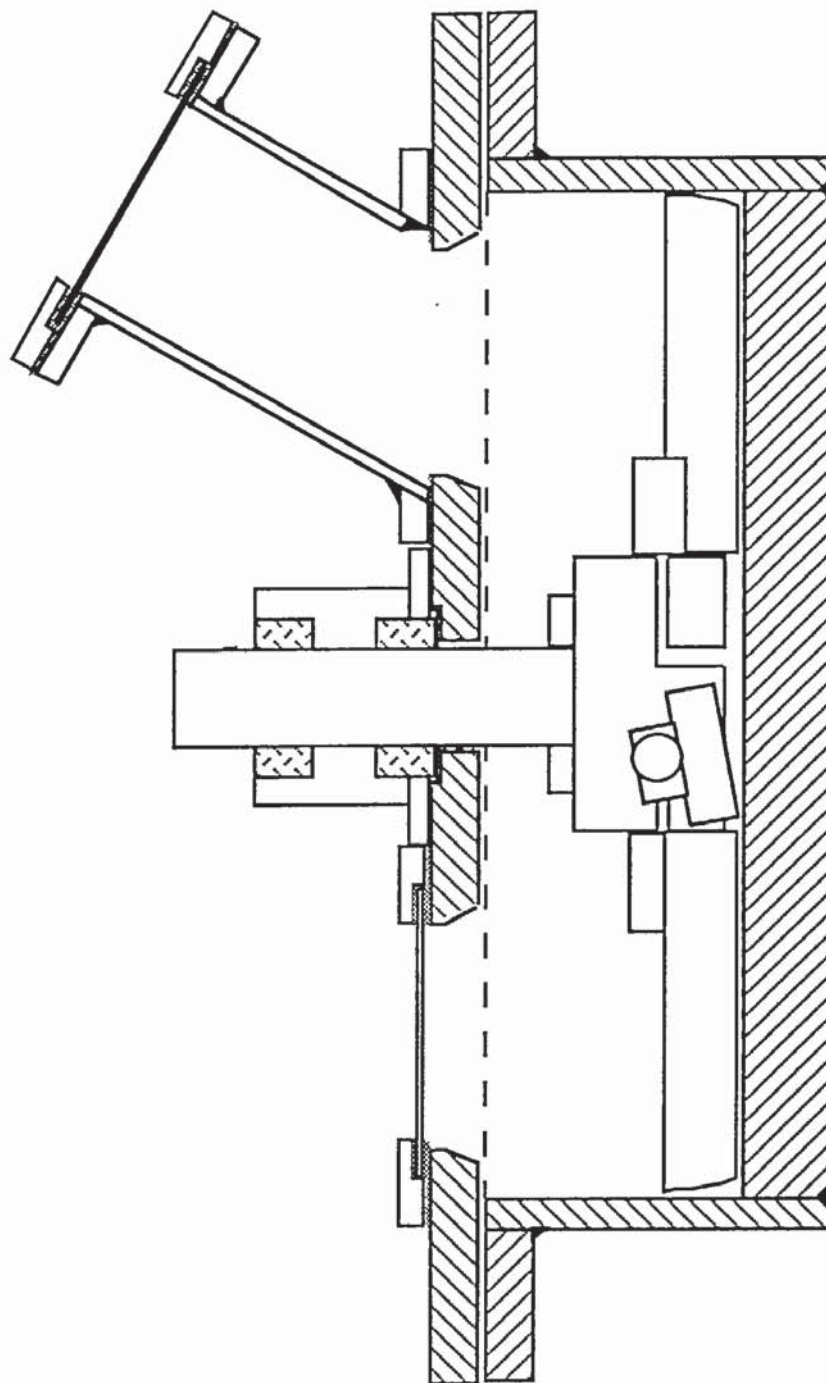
The assembled pyrolysis reactor with the rotating blades and holder
